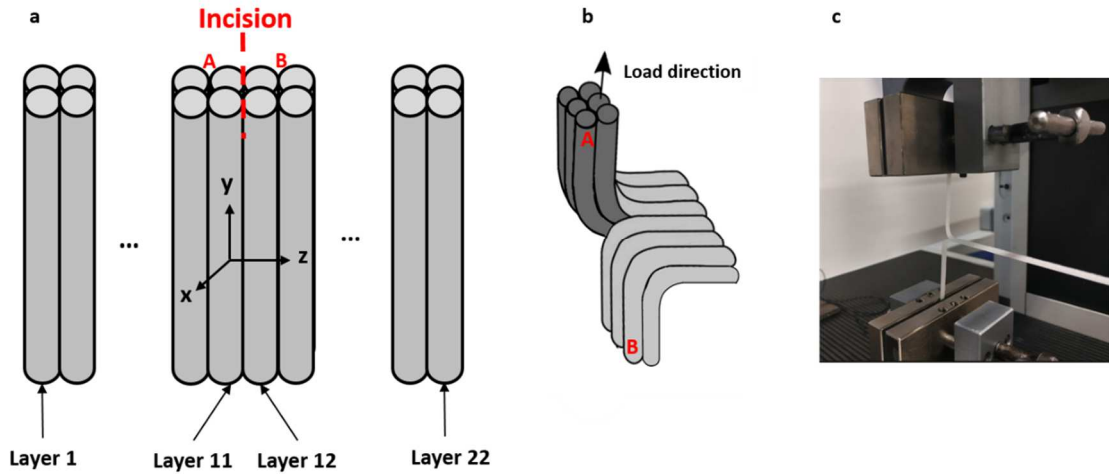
Protocol used to measure the adhesion strength. a) Location of the incision performed between the 11th and 12th layers. b) Typical testing configuration of a sample during a measurement. c) Photograph of tests performed with a uniaxial tensile test machine.
